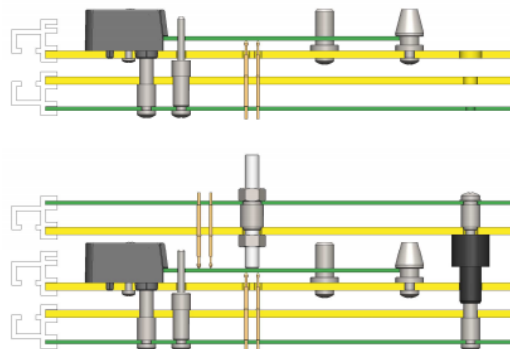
A three PCB module (top) and a five PCB module (bottom)
